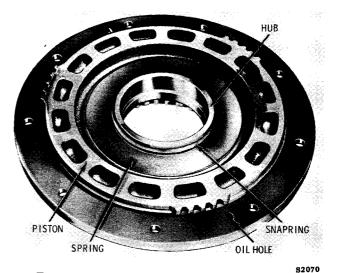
Direct drive clutch piston, installed in cover (earlier model VS2 series)
